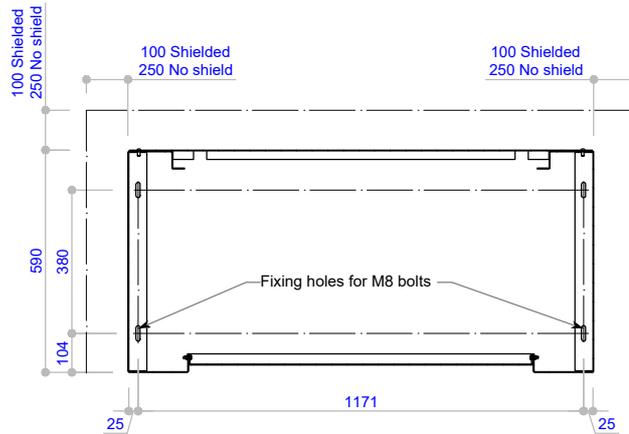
Sheet 01 of 07	Revision 3
